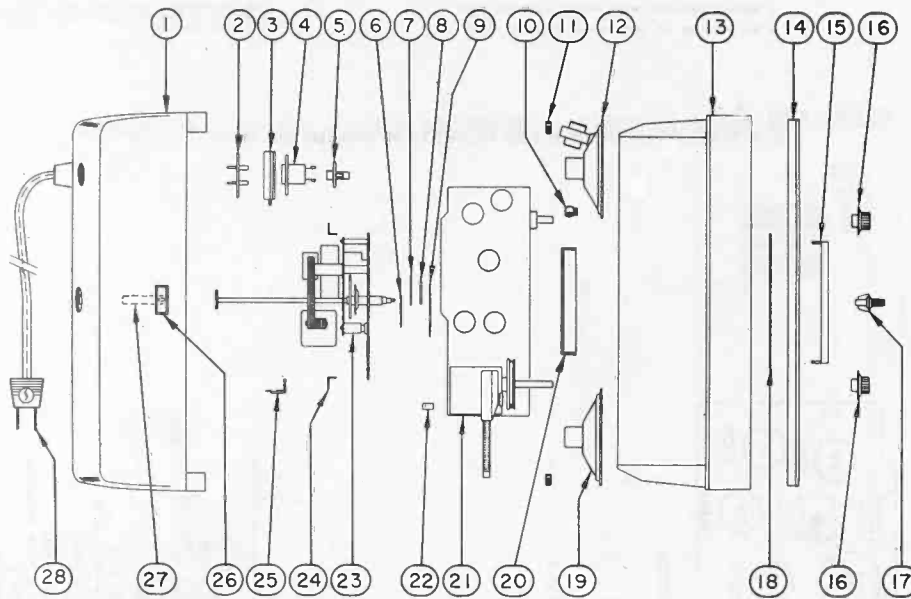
EXPLODED VIEW OF CABINET PARTS
